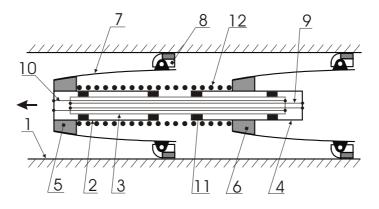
Global arrangement of in-pipe micromachine 1-pipe, 2-front tube, 3-middle tube, 4-rear tube, 5-front flange, 6-rear flange, 7-flat spring, 8-contact element, 9-rear SMA wires (4x), 10- front SMA wires(4x), 11-guide bush, 12-compression spring
